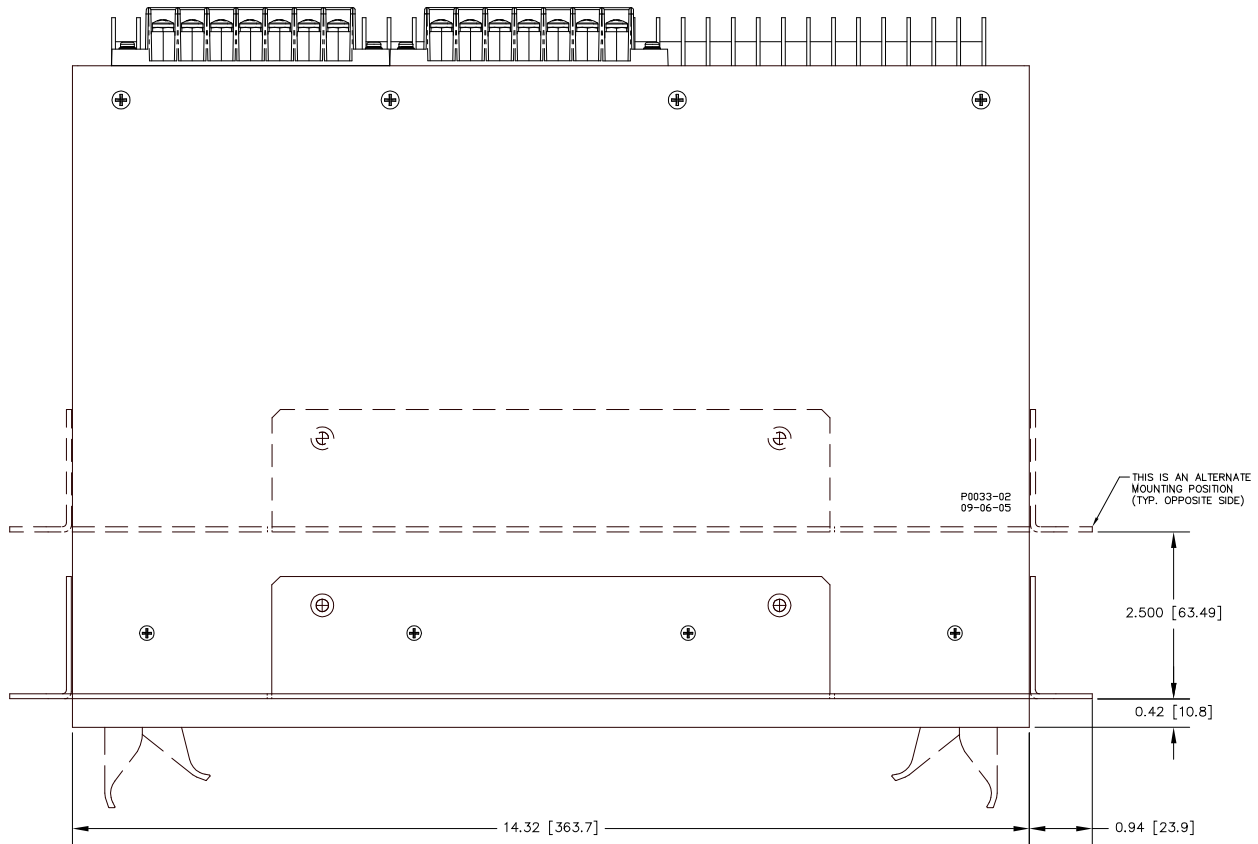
Vertical Panel Mount, M-size, Side View or Horizontal Panel Mount, Top View
